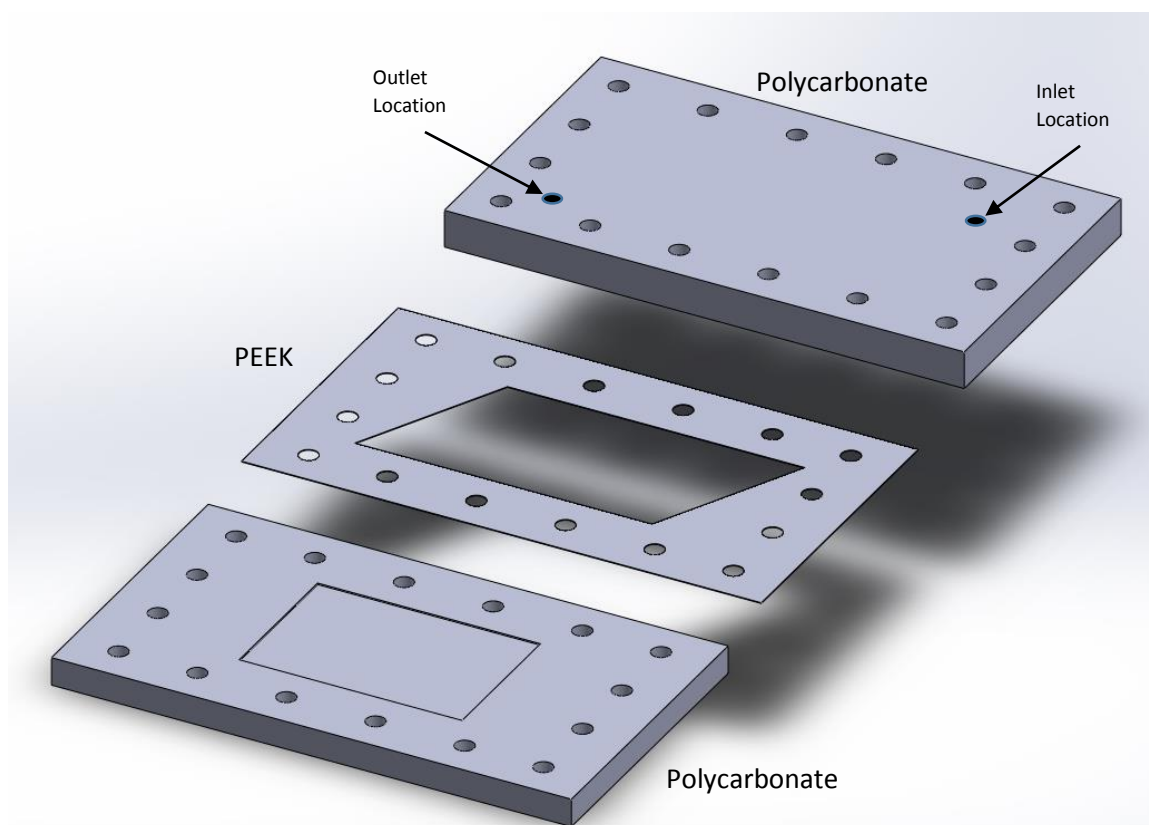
2: SolidWorks drawings of microfluidic flow cells. Top and bottom pieces were machined out of polycarbonate with a CNC mill. The middle piece was made out of PEEK cut by a ESI 533 Laser Cutter. Alginate gels were deposited in the well of the bottom piece and the device was assembled with two PEEK middle pieces sandwiched between the polycarbonate top and bottom pieces and held together with screws. The PEEK pieces create a flow path for media solutions in the device. Inlet and outlet ports were tapped into the top piece to allow flow through the device. For dimensions see Appendix A.
